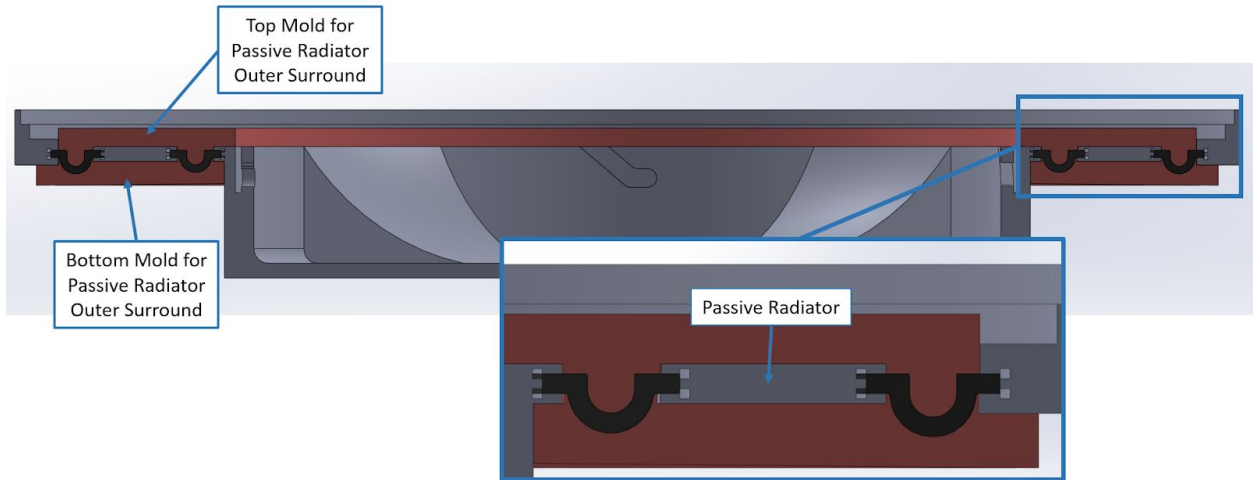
Section View of Molds for Bottom Passive Radiator Surrounds
